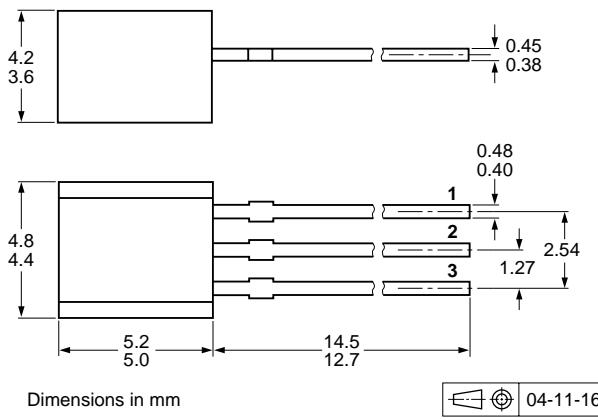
Package outline SOT54 (SC-43A/TO-92)
